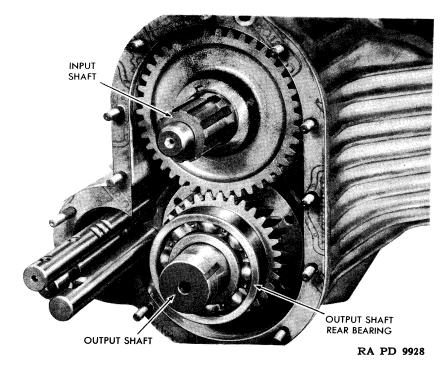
Rear of transmission (cover with input shaft bearing removed).
